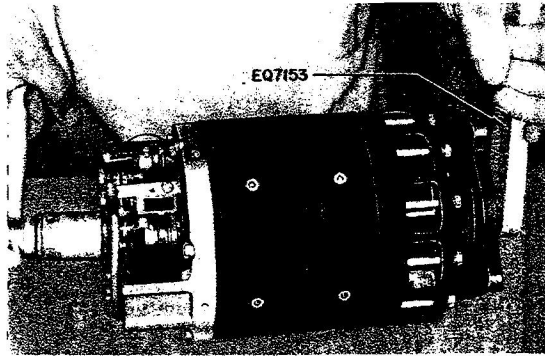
Tightening the Nut at the Commutator End of the Armature Shaft
